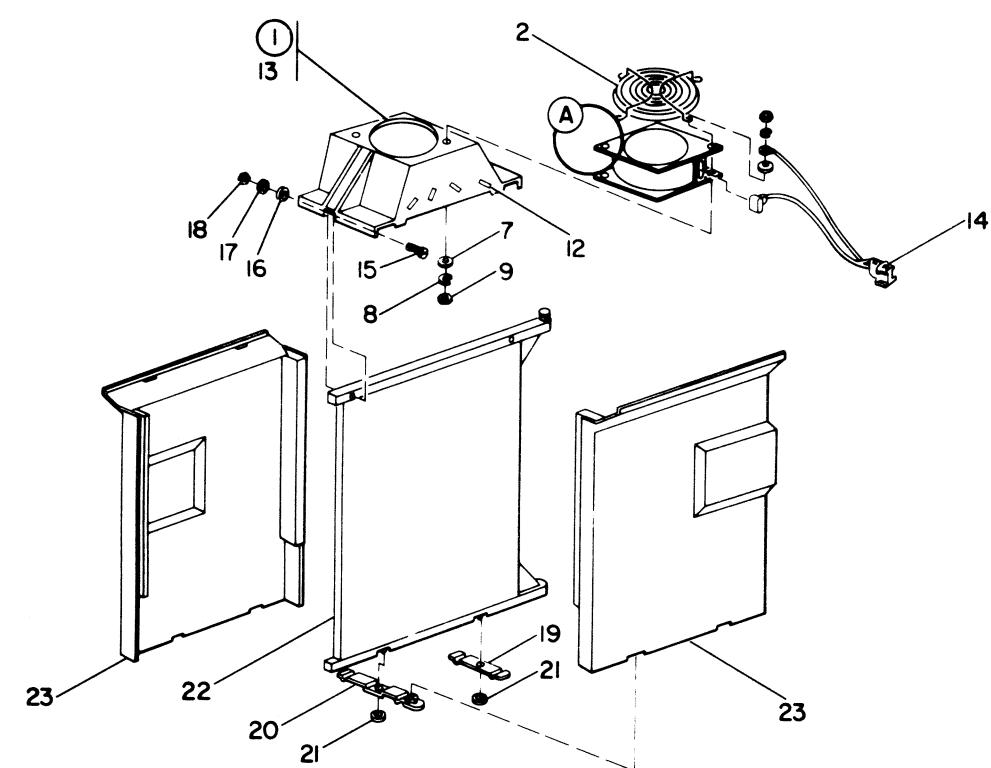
BALANCE ASSEMBLY. SEE LIST 13.
